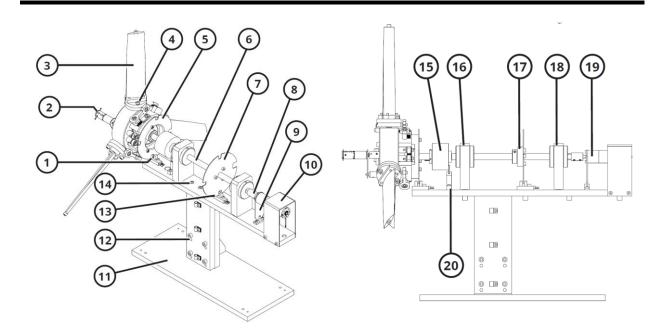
Components of MU Wind Turbine (Side View): (1) Photo interrupter for pitch, (2) Pitch motor, (3) Wind turbine blade, (4) Mounting plate for blade, (5) Timing disk for pitch measurement, (6) Low speed turbine shaft, (7) Timing disk for RPM measurement, (8) Generator coupler, (9) Torque-arm for generator, (10) Generator protection cover, (11) Base plate, (12) Wind turbine tower with multiple holes for height adjustment of hub, (13) Photo interrupter for RPM, (14) Mounting plate for turbine shaft, hub and sensors, (15) Slipring assembly, (16) Mount for shaft bearings, (17) Timing disk for RPM measurement, (18) Mount for shaft bearings, (19) Generator with integrated planetary gearbox, (20) Torque arm for slipring assembly.
